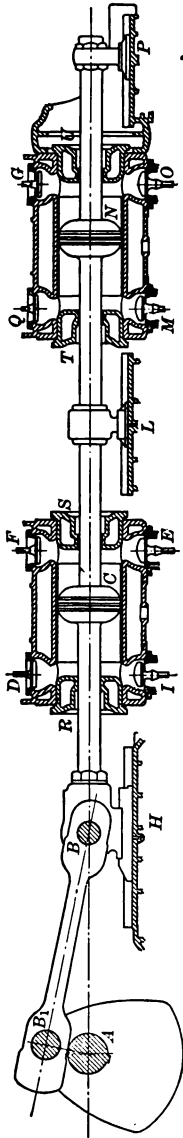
ALLIS-CHALMERS DOUBLE-ACTING TANDEM FOUR-STROKE GAS ENGINE
